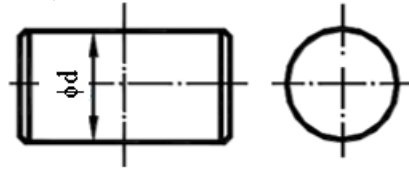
The pieces in the batch (100 pieces) in the measuring position
